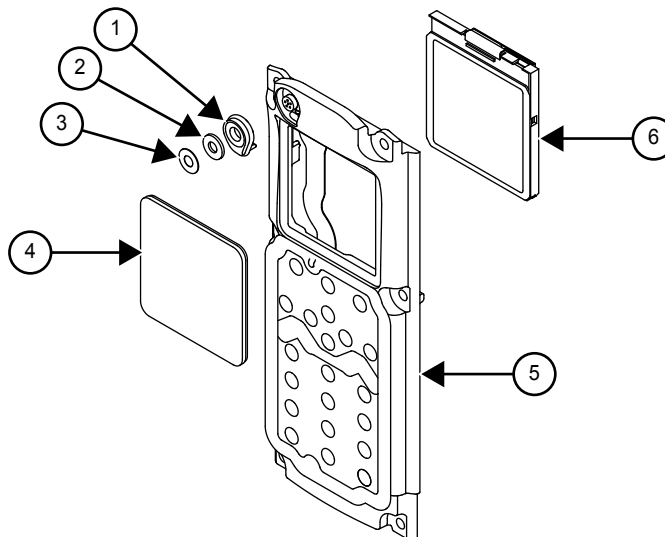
Back Chassis Assembly (Dual Display Versions) - APX 8000XE
